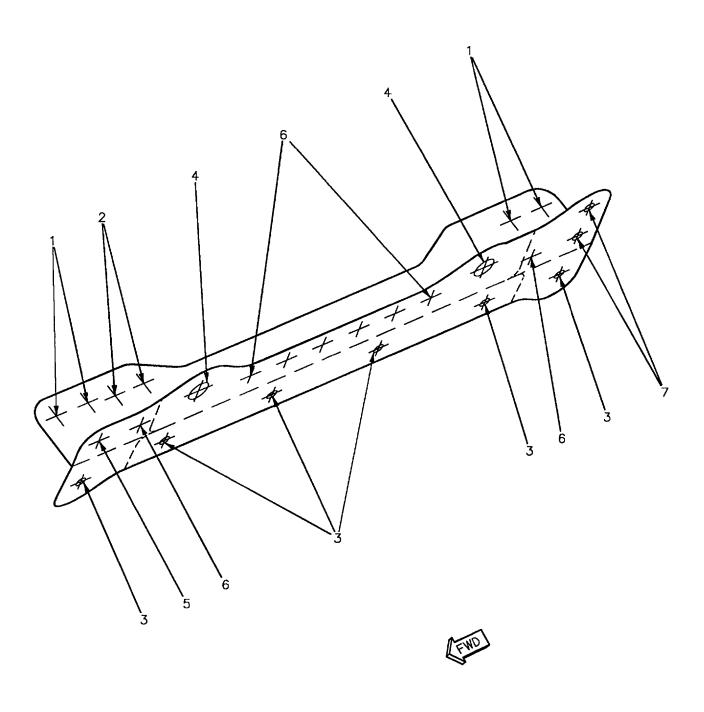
Tee, 74A315059, Fastener Index (Sheet 1)
